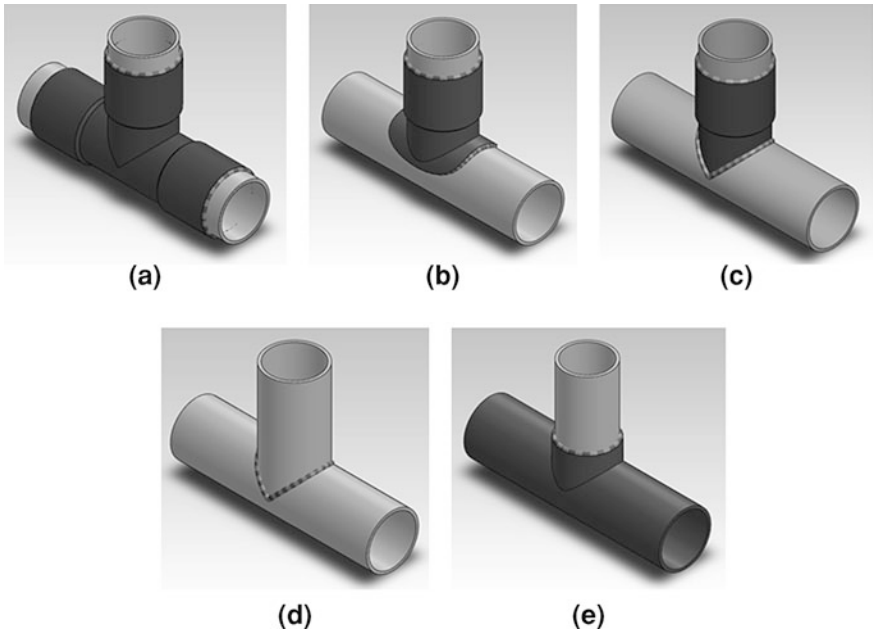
Conventional tube branching by means of a tee fittings, b saddle adapters, c weld-o-lets, d nozzle-welds and e spin-forming
